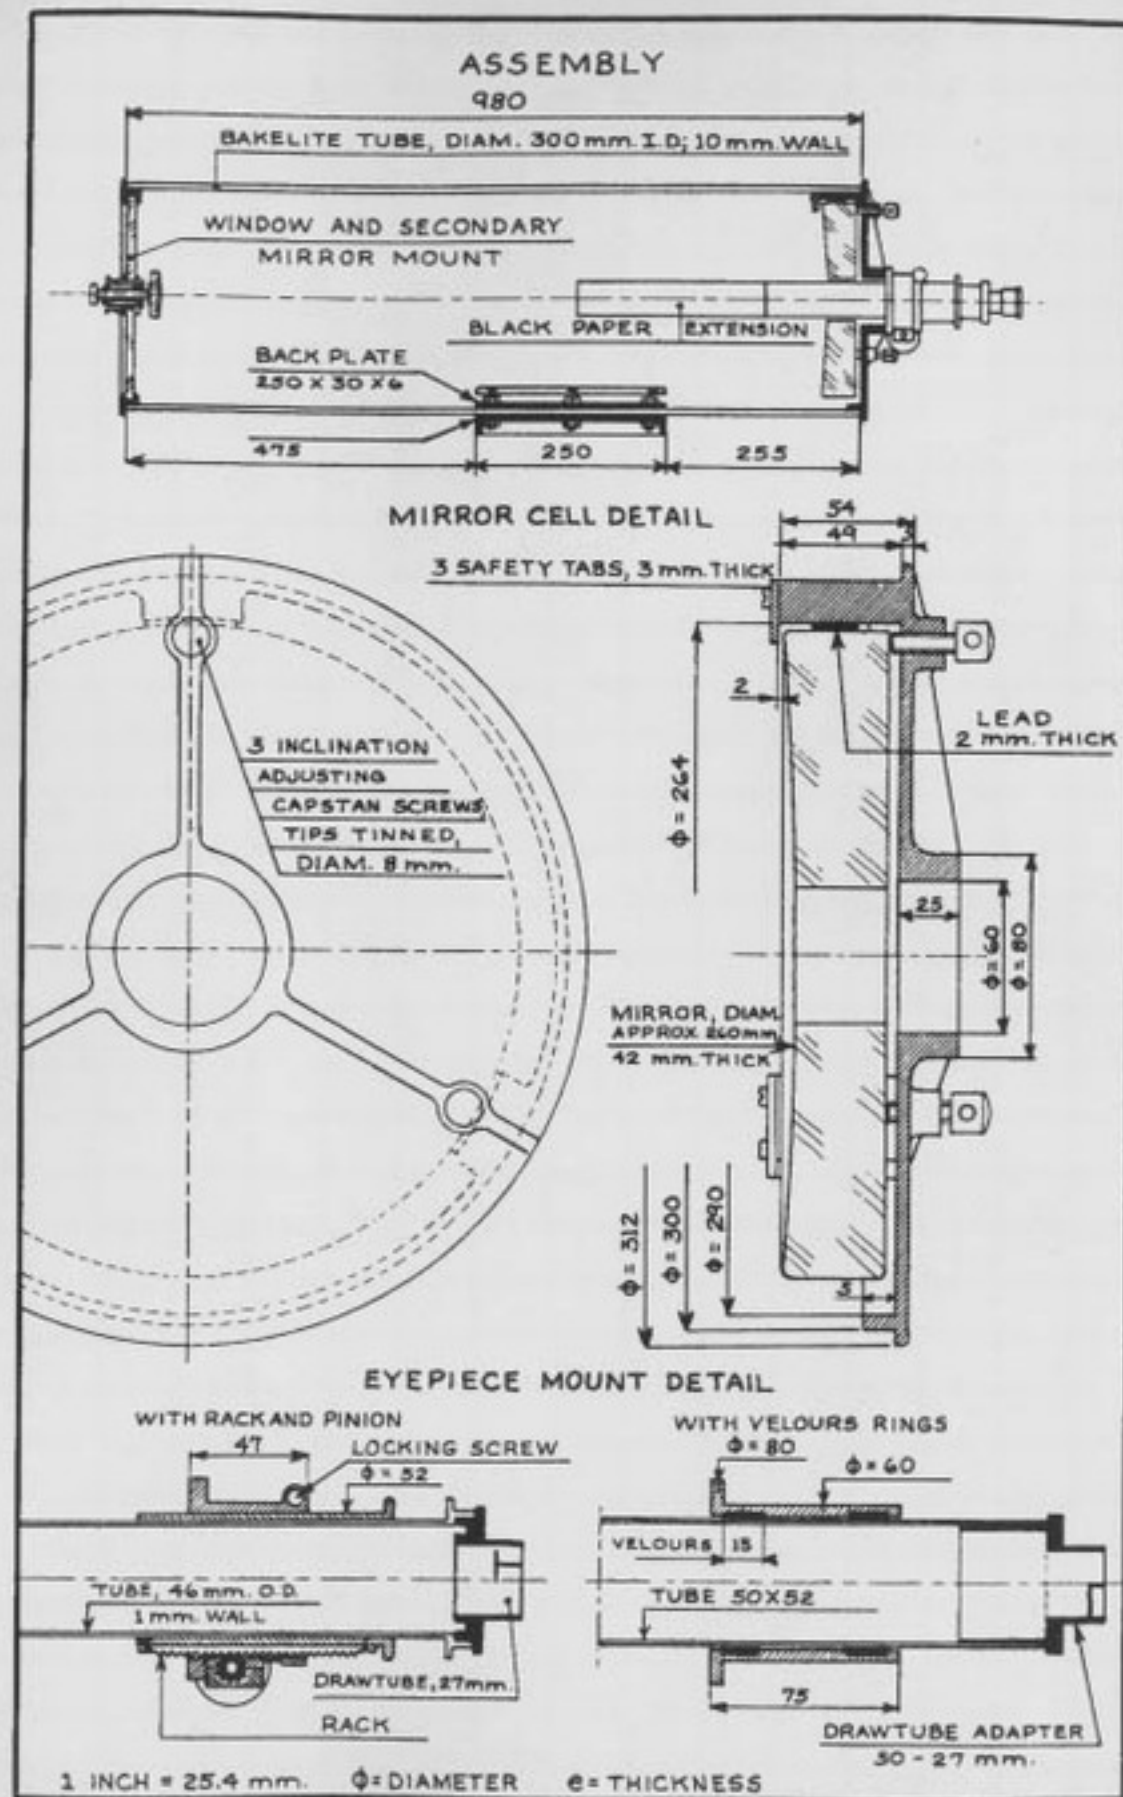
Design of a cylindrical-tube Cassegrainian.
